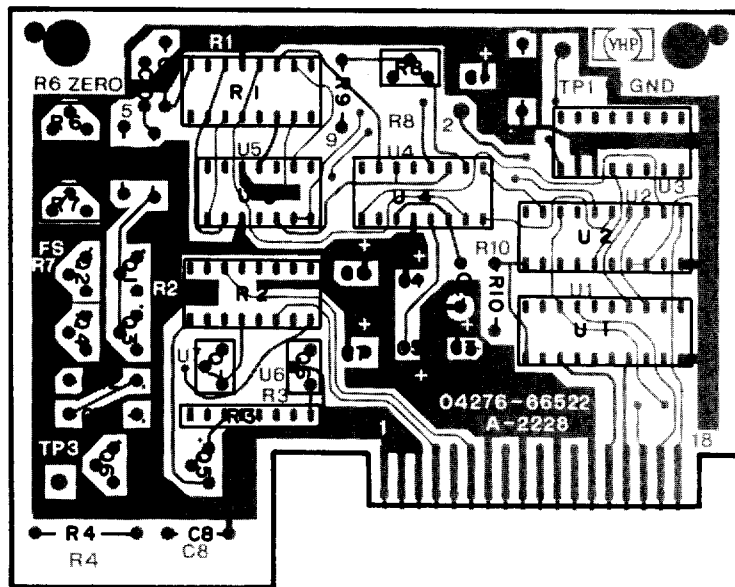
A22 OPTION 001 INTERNAL DC BIAS Board Assembly Component Locations.
